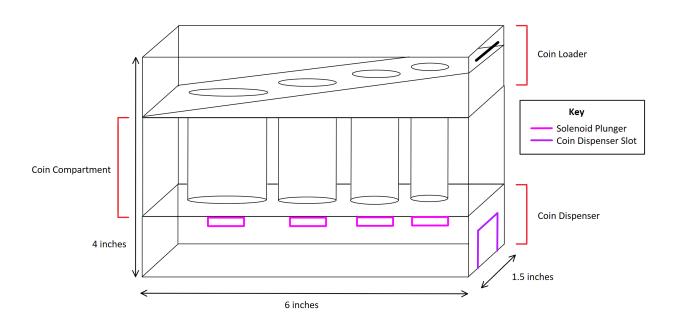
Pocket Pal Physical Design of Coin Dispenser
